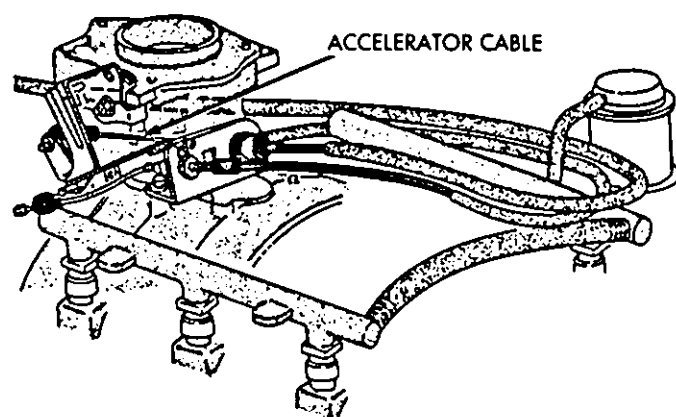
Accelerator Cable Removal/Installation—3.0L Engine
